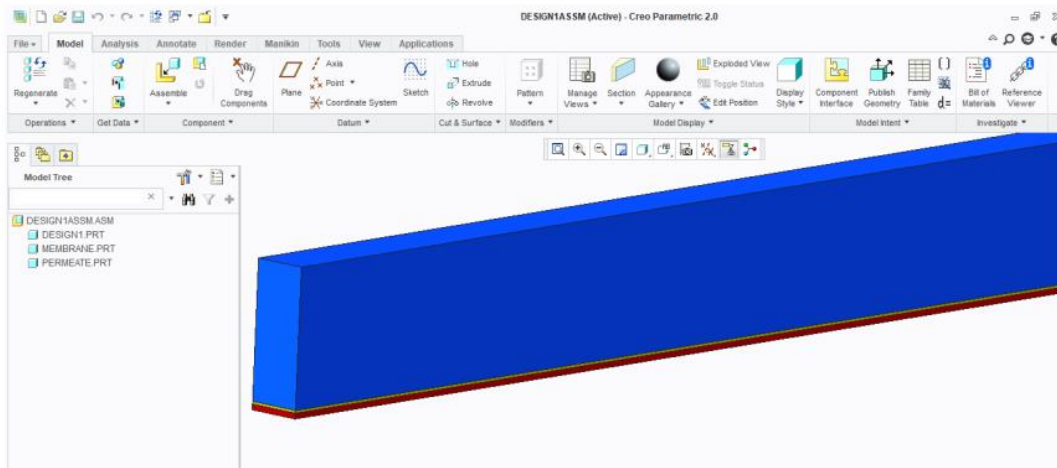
CAD 1- model Assembly Using Coincident Constraints
